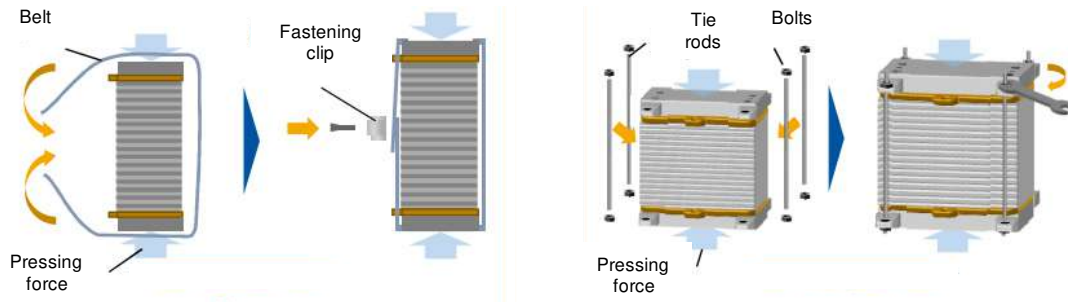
Clamping of the stack. Left: Assembly belt, right: Tie rods (adapted from [26])
